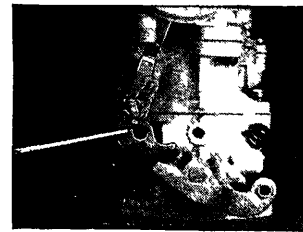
Install fast idle cam and pin. Then adjust fast idle lever and link up according to the specifications given in the Carter Specification table, and as shown in Figs. 97 and 98 for W-1 carburetors
